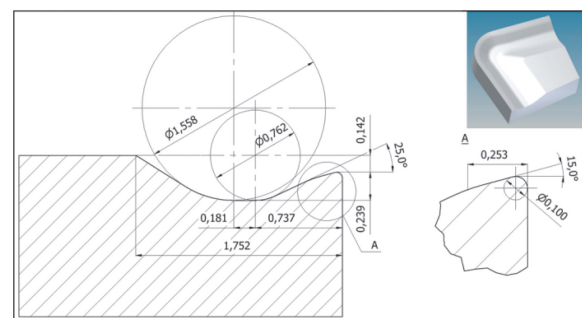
Dimensioned cross-section of Kennametal cutting insert type CNMG 120412-UP with CAD model of tool edge used in FEM simulation
